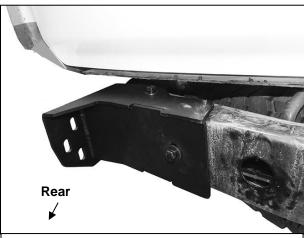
Insert 10mm x 45mm Hex Bolt, 10mm Lock Washer and 10mm Flat Washer through Bracket and into Long Nut Plate. NOTE: Bend handle on Nut Plate as needed to line up with mounting hole
